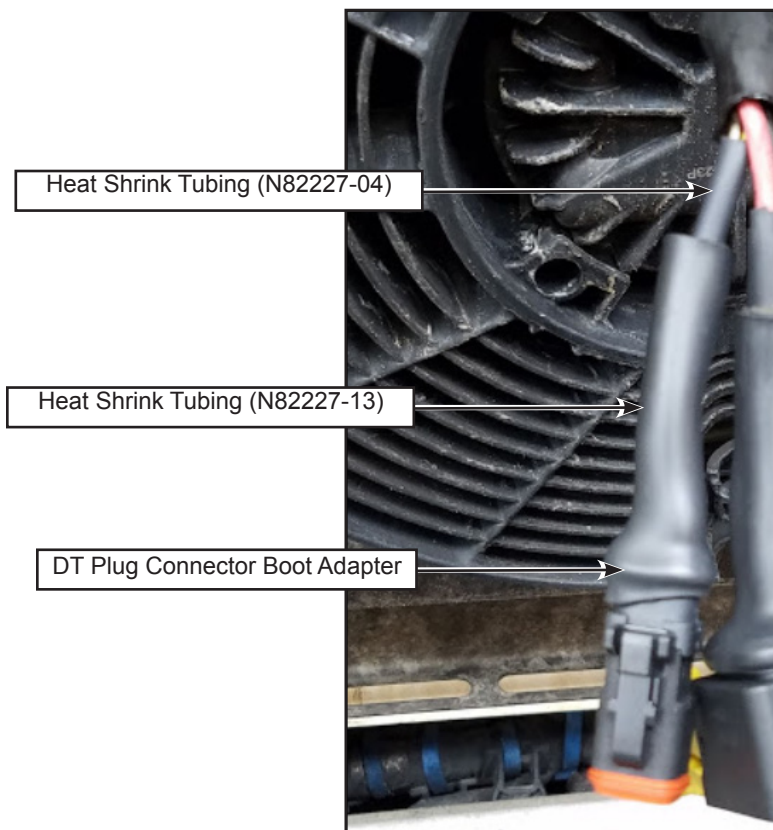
Heat Shrink Tubing Installation on DT Plug Connector Wiring at Fan Side
